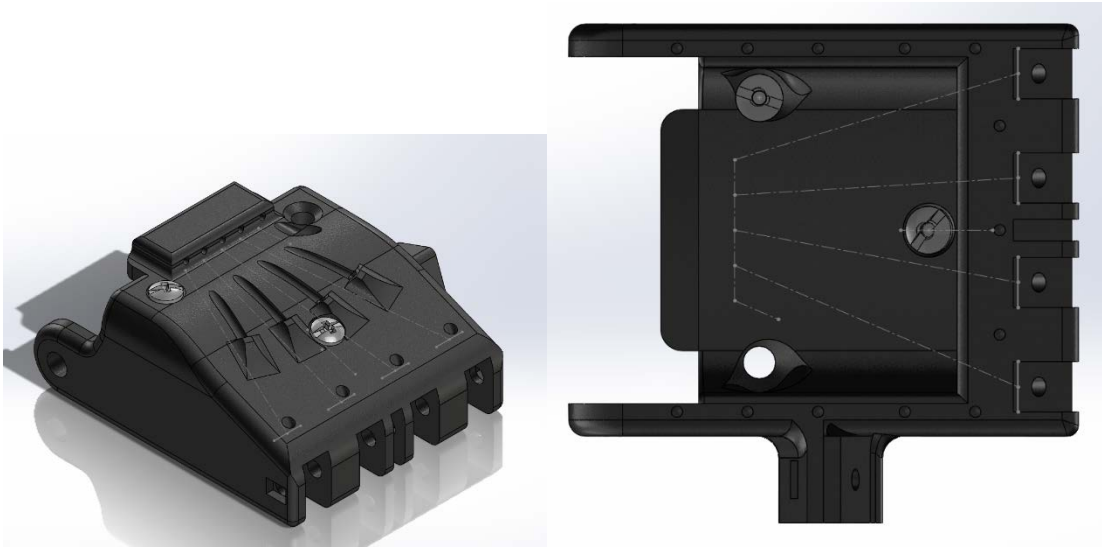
Gen 5.1 Hand Base with Velcro Attachment Screws
